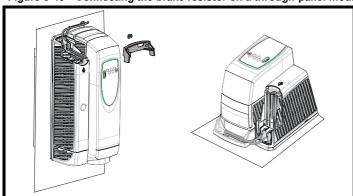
Connecting the brake resistor on a surface mounted size 2
